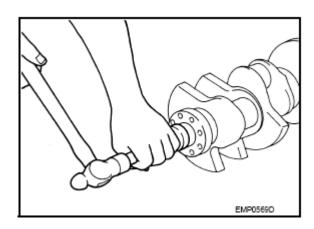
Pressing Pilot Converter Into Crankshaft Using Drift Courtesy of NISSAN MOTOR CO., U.S.A.
